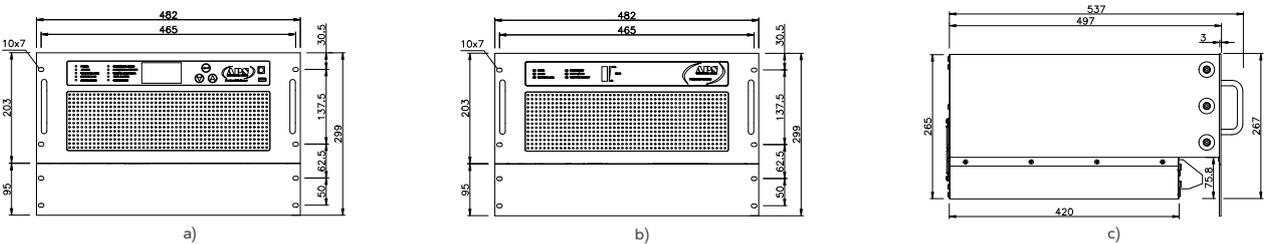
Views with dimensions of the M/MC/MCE PBI rectifier module in the M3 enclosure:
